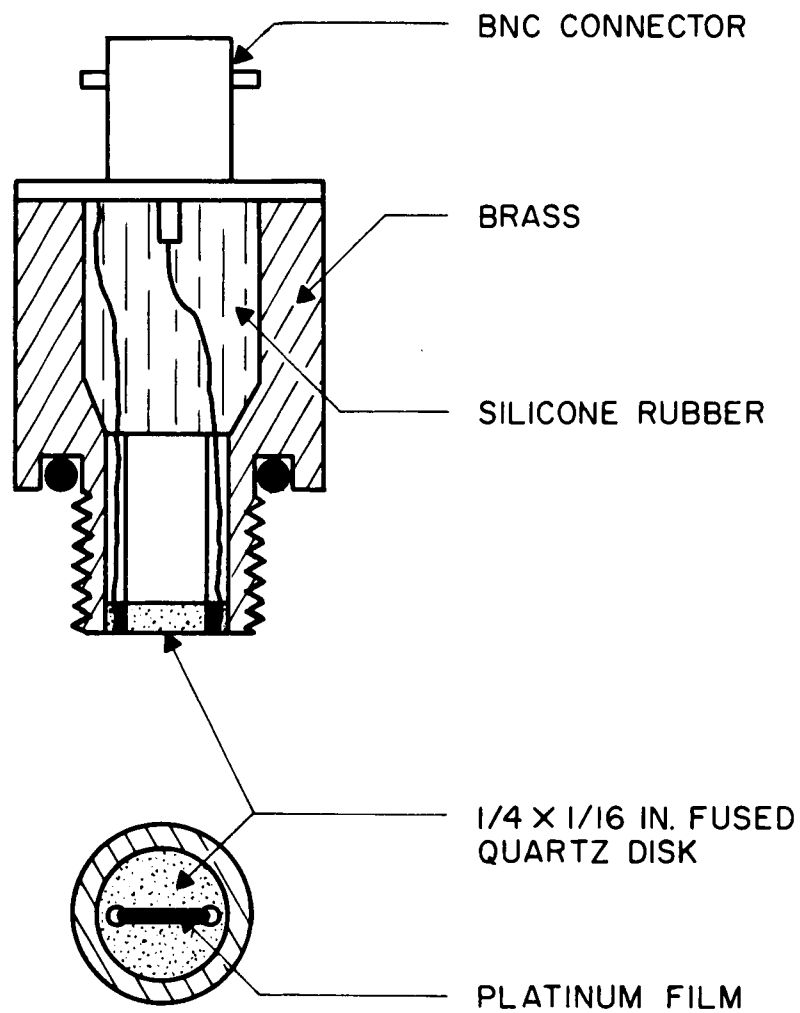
Assembly Drawing of Heat Transfer Gauge.
